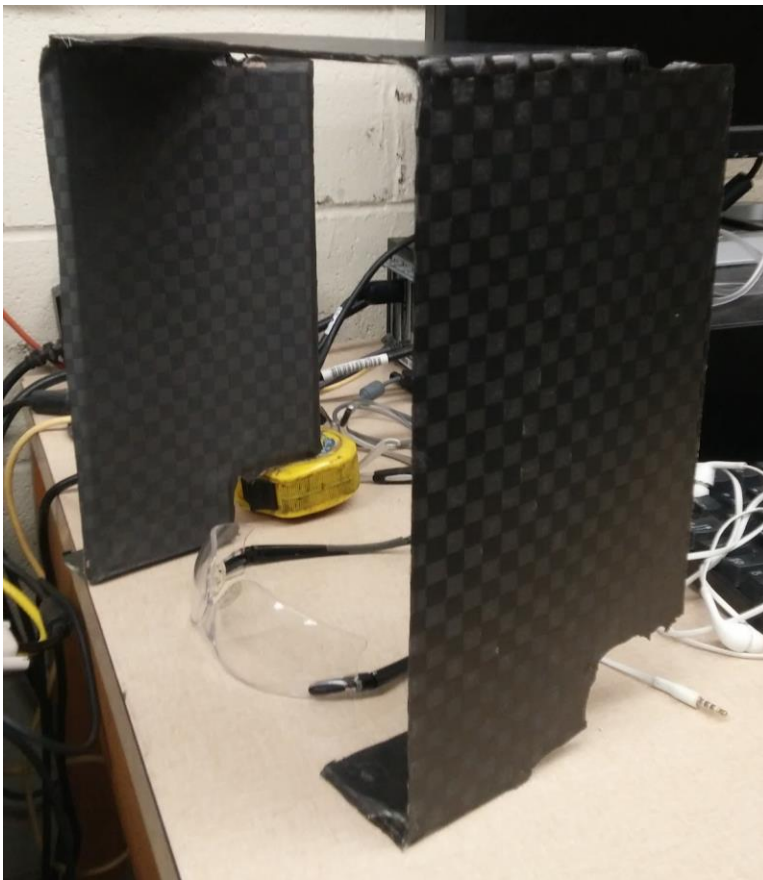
A front left duct piece before being post processed. Note the rough edges that need to be sanded.
